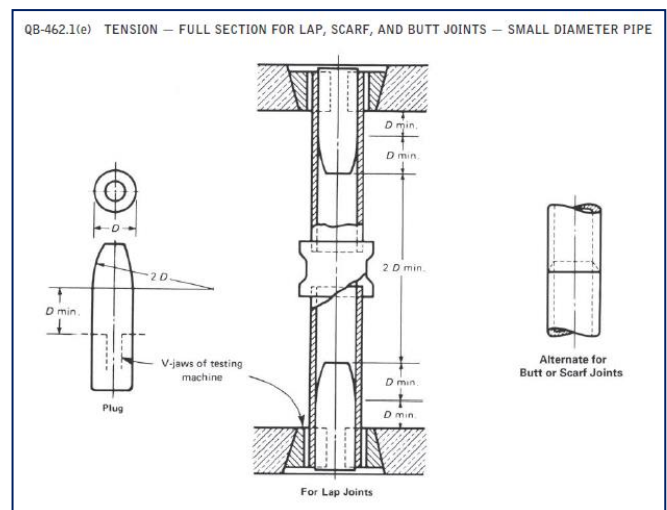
Tensile test sample configuration as per AWS Sec IX [8]
